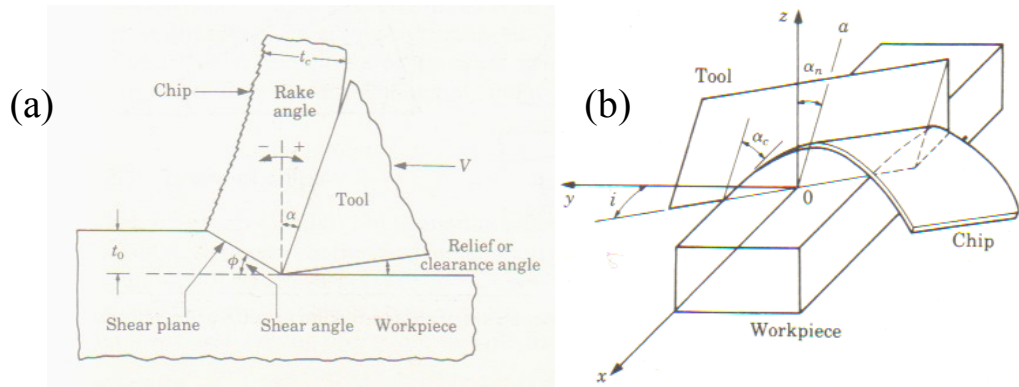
Chip formation schematics (a) Orthogonal cutting (2d cutting process), (b) Oblique cutting (Top view showing inclination angle) [29]
